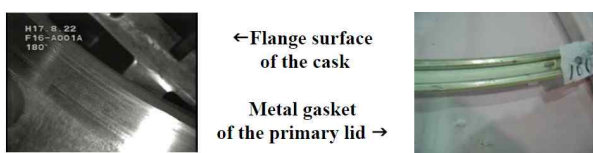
Images of the flange surface of the cask and the primary lid metal seal from 2005 inspection
